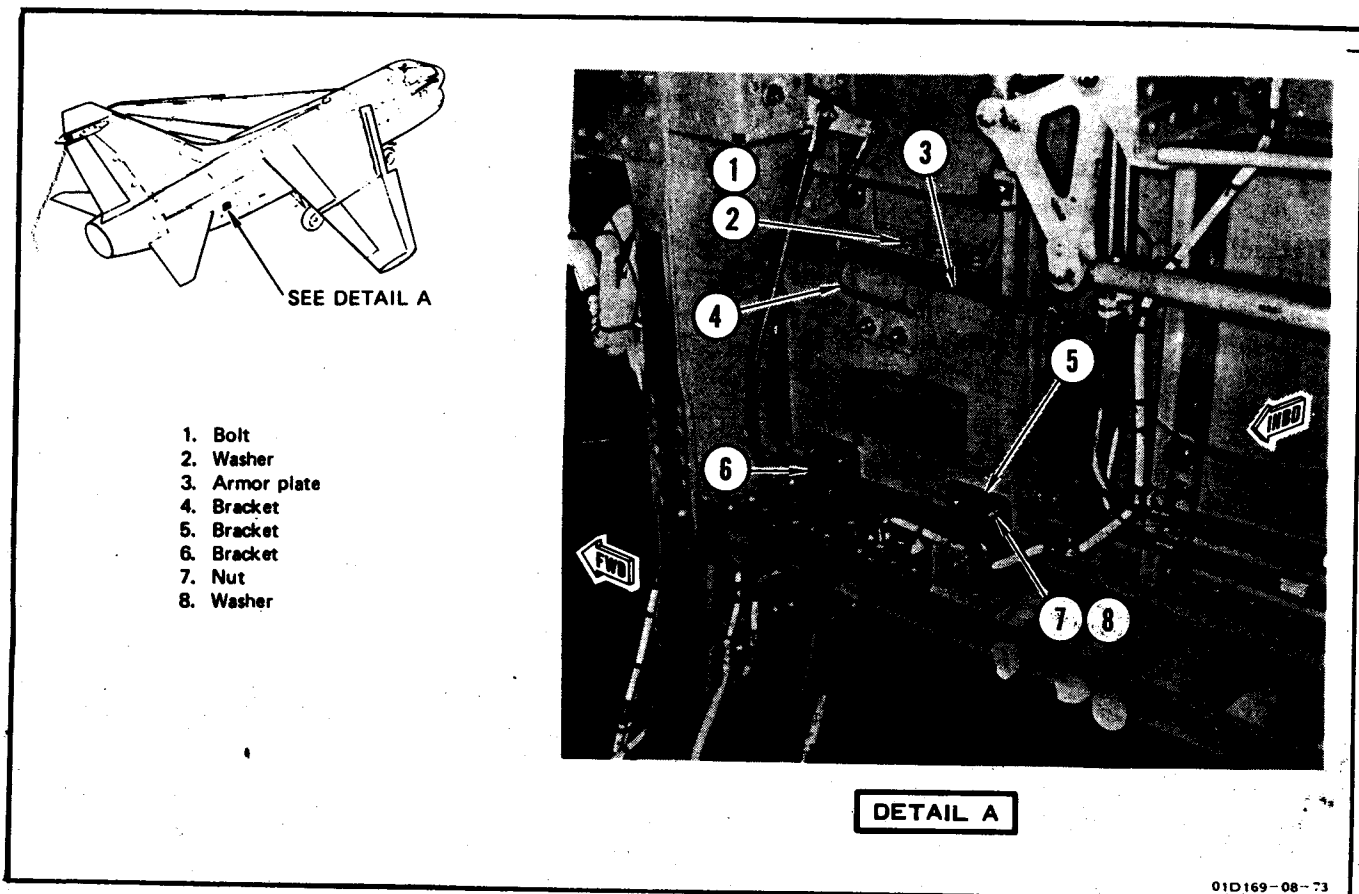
Upper Right Armor Plate (FS 590 to 600) Removal and Installation
